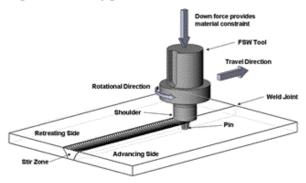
(FSW) Friction stir welding used for joining the two dissimilar metals[15]
